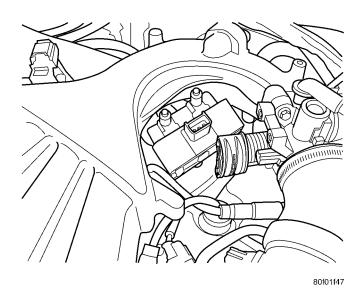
IGNITION COIL REMOVAL/INSTALLATION
